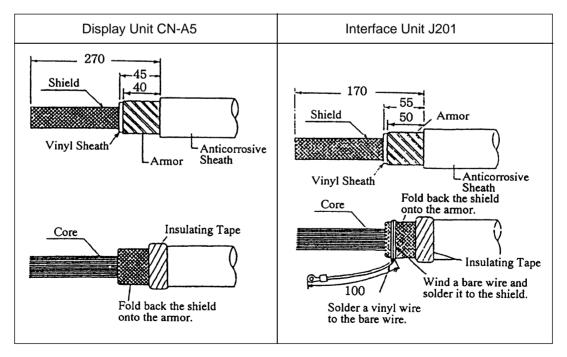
Fabricating cables for connection with display unit, interface unit
